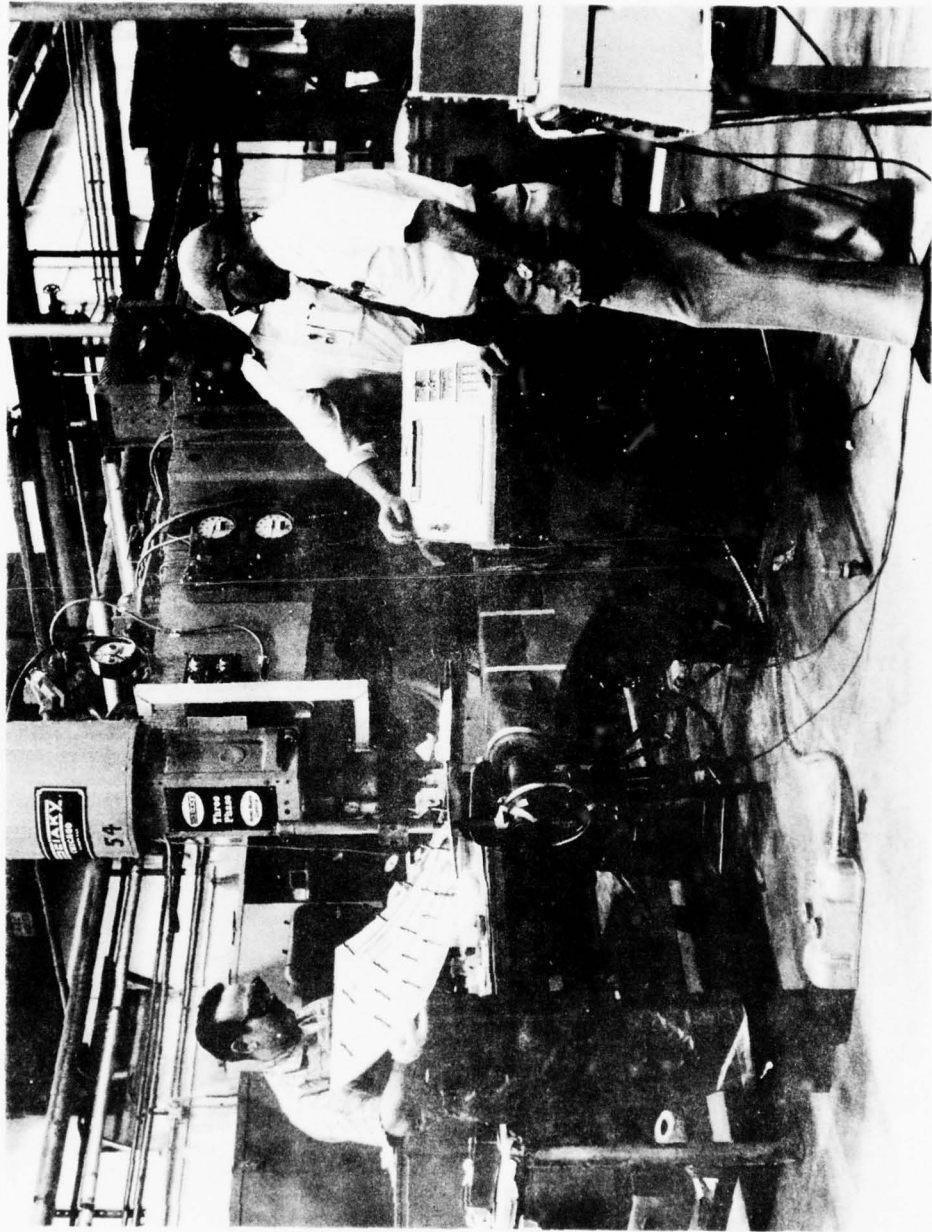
RESISTANCE WELDING MACHINE, PERTRON MICROPROCESSOR AND MONITORING/RECORDING EQUIPMENT
